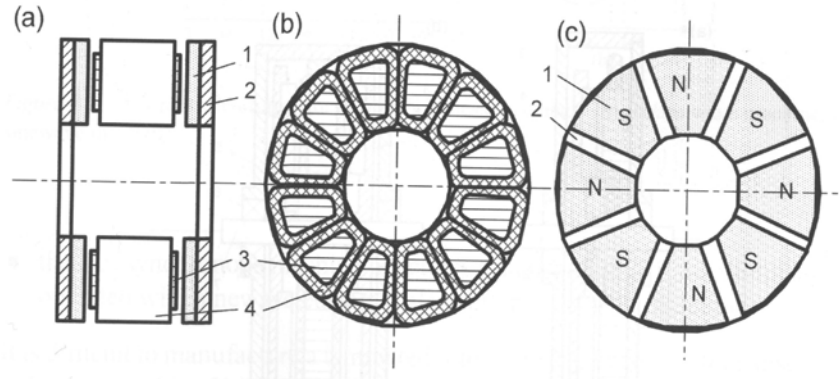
Double-sided AFPM brushless machine with internal salient-pole stator and twin external rotor (a) construction, (b) stator (c) rotor, 1-rotor steel disc, 2-rotor, 3- stator pole, 4-stator coil
